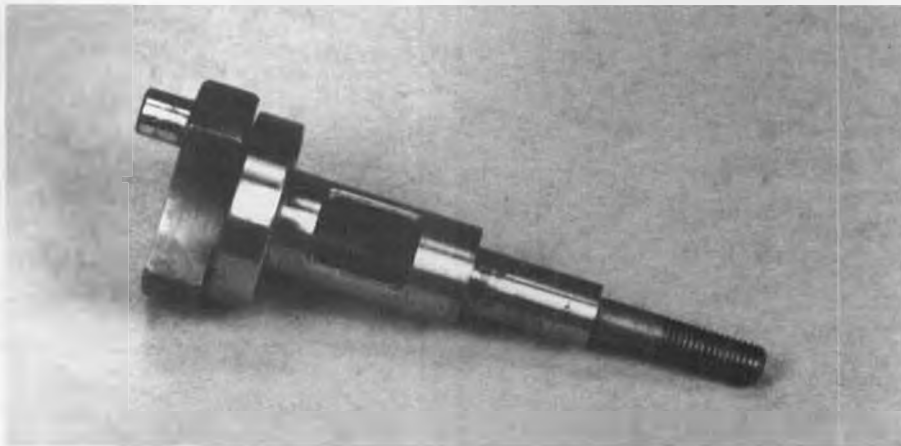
Sometimes the rear bearing comes out with the shaft. No big deal.
